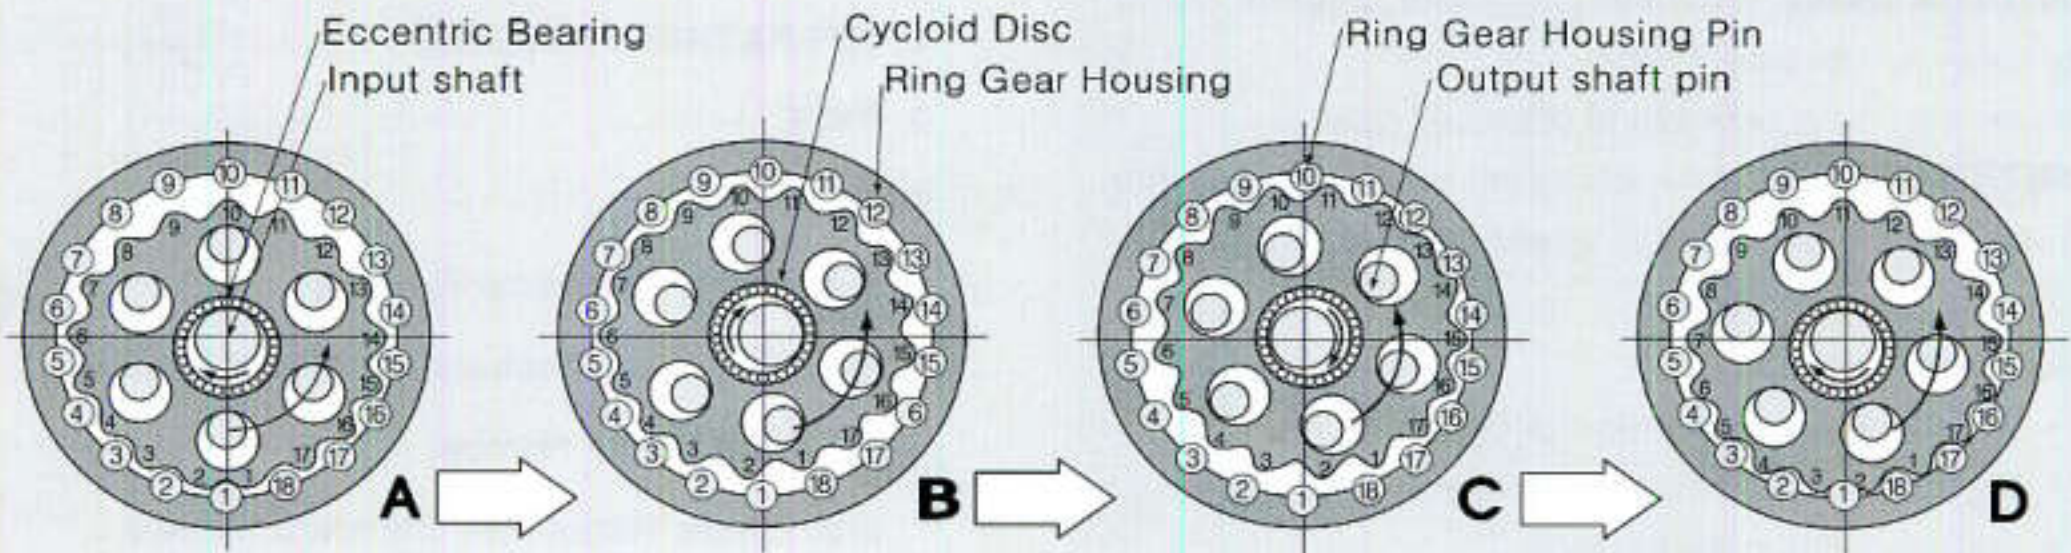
Fig. A : As Input shaft(motor shaft) rotates by one turn, the eccentric bearing also rotates by one turn on same direction as motor shaft together.
